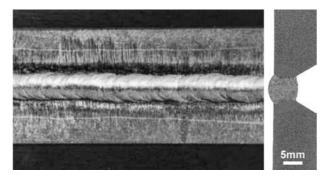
The surface and macrosectional profiles of a penetration bead protruding on the reverse side of a single-Vgroove weld.
